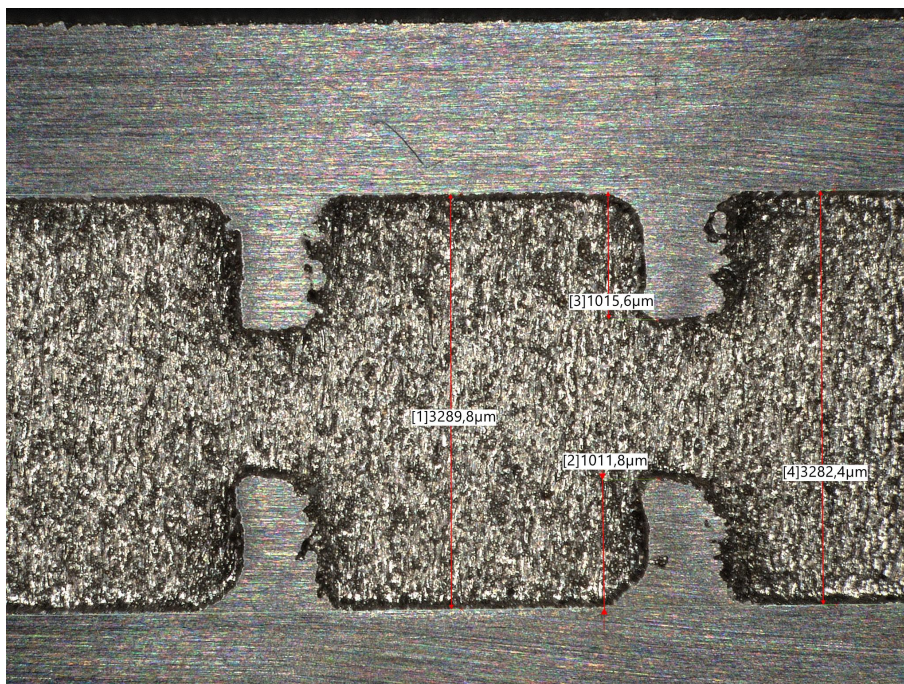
Dimensions of cavity in PBF-LB E band filter.
